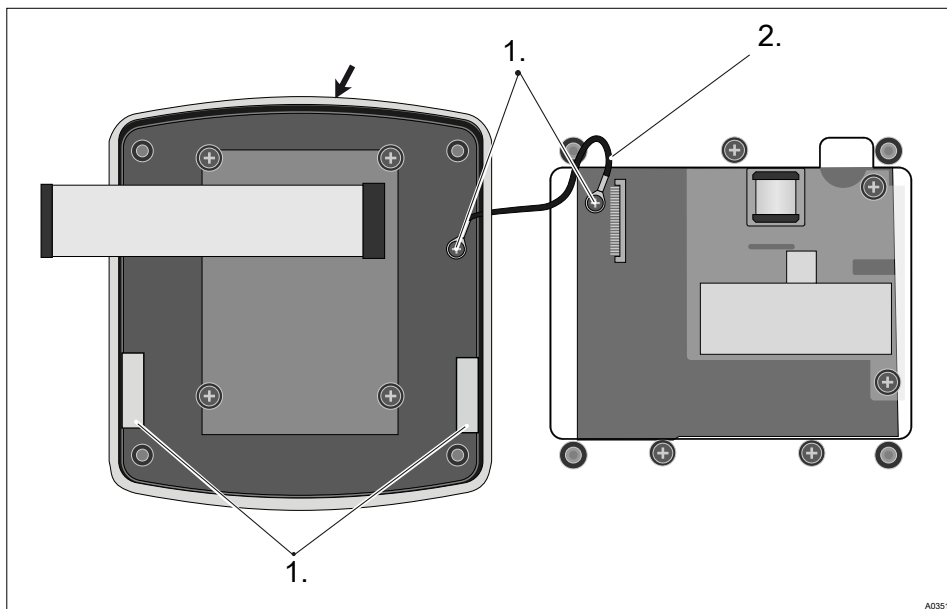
Fitting the profile seal onto the top section of the controller housing
